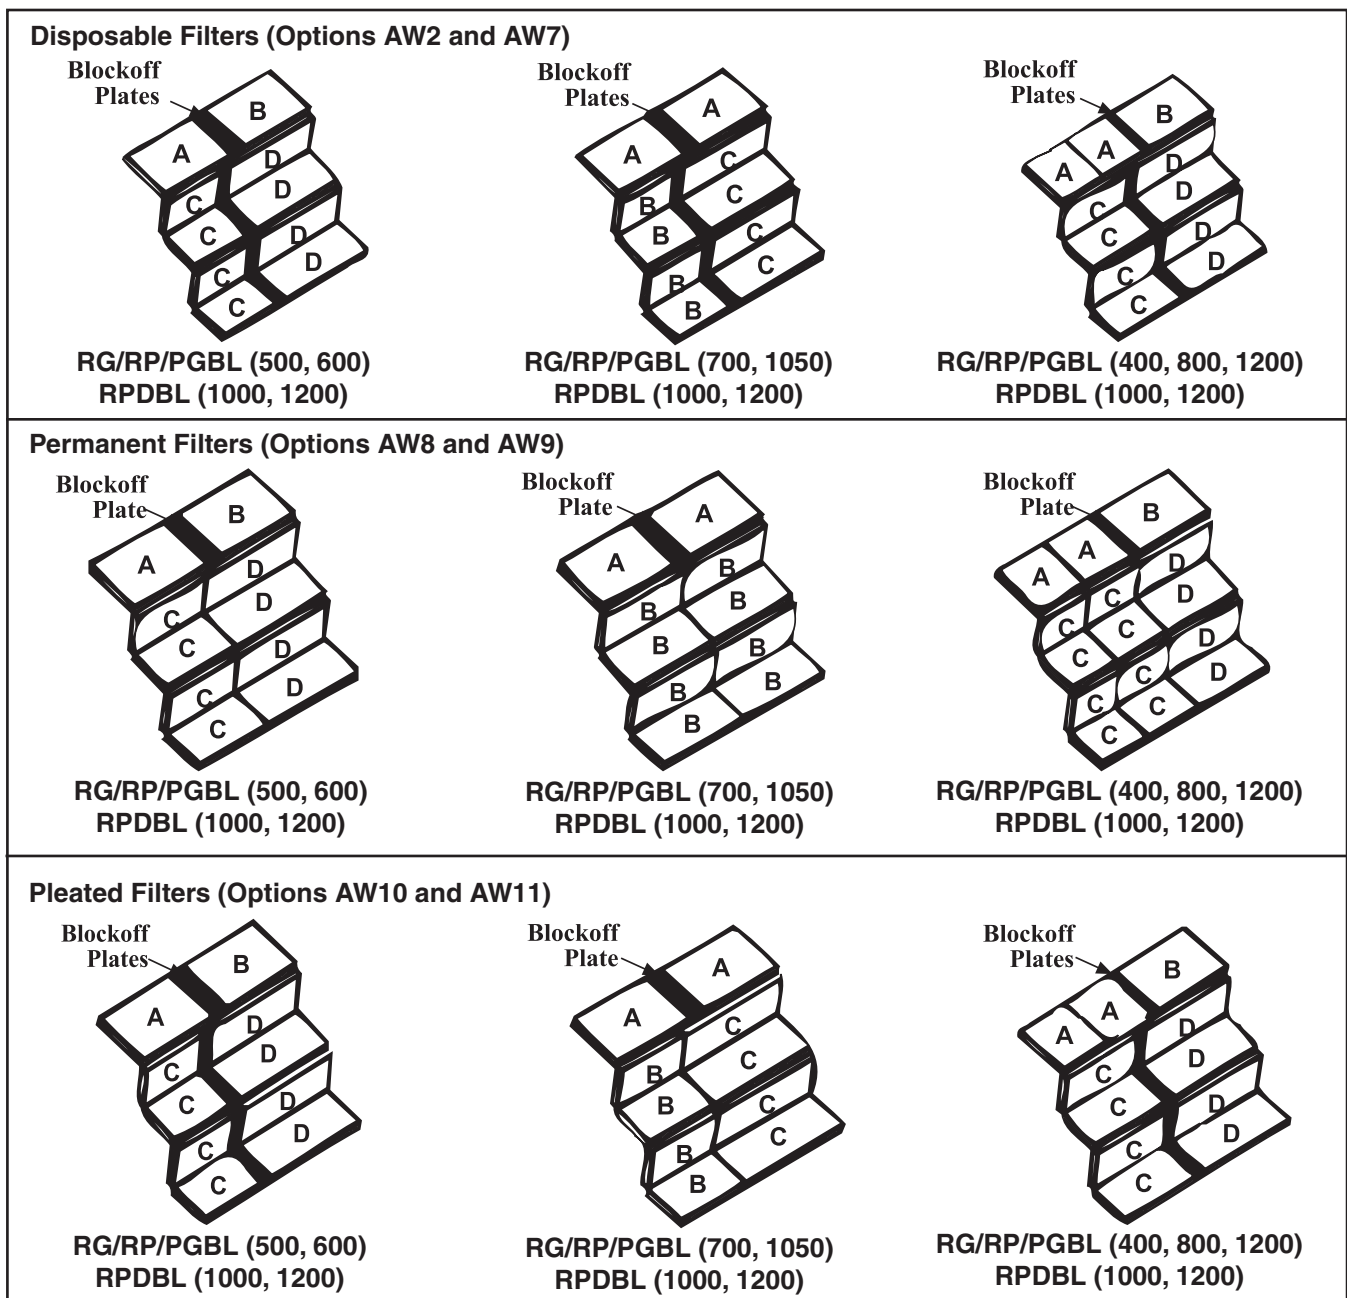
Filter Arrangements—RGL, RPBL, PGBL, and RBL (Blower Cabinet) Models Manufactured *After* AUG 1991 (Refer to [Table 55](#))
